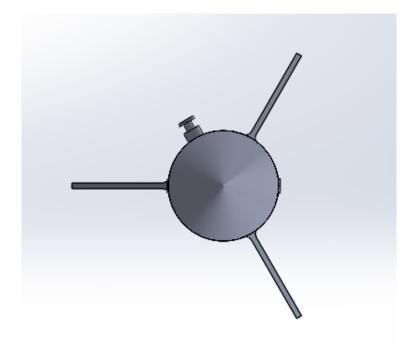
A front view of the rocket modeled in SolidWorks. The large protruding cylinder is a launch lug.
